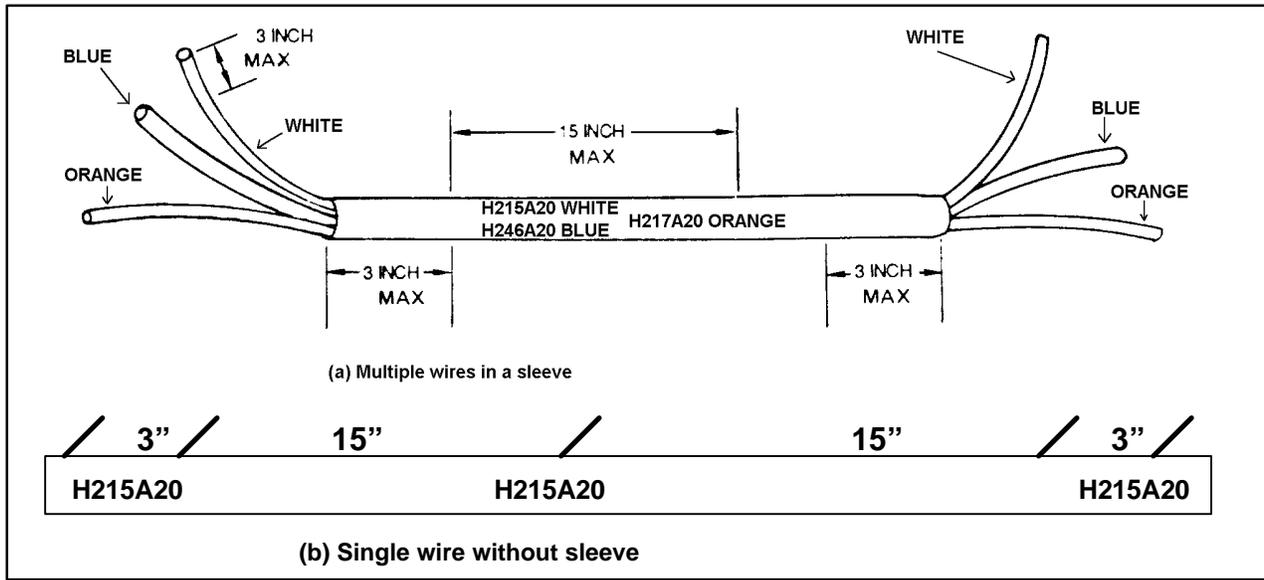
Spacing of printed identification marks (direct marking).
